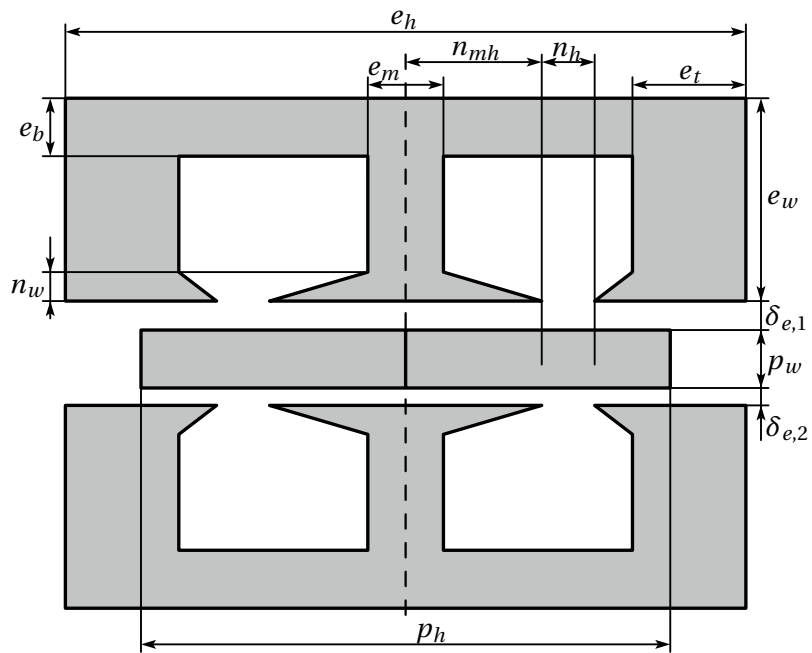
Cross-section of the prototyped actuator. Only magnetically active parts are shown.
